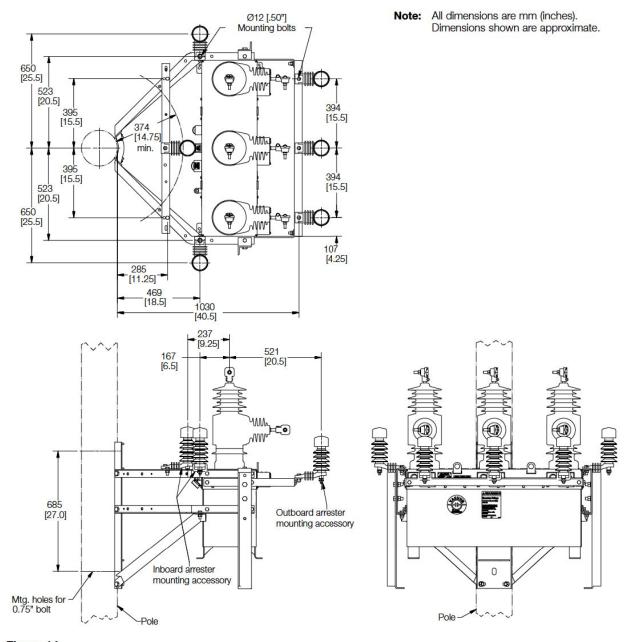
Dimensions of NOVA STS recloser with site-ready pole-mounting hanger and arrester-mounting bracket accessories.
